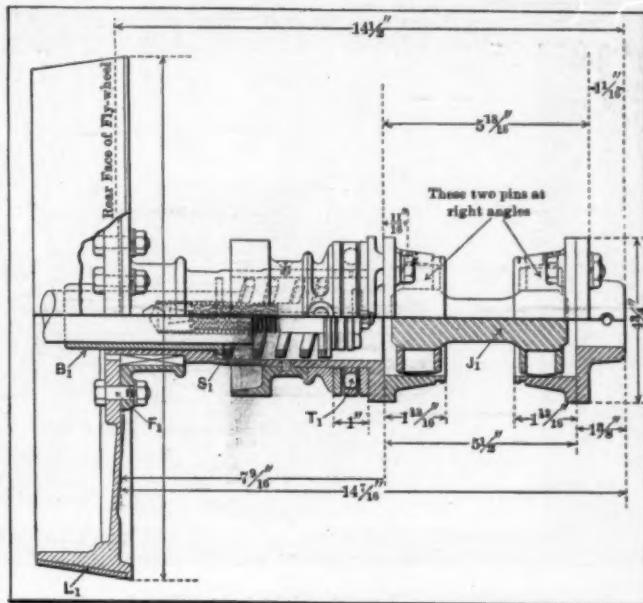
Section of clutch, of the cone type, with square spring, leather facing, and ball thrust bearings
